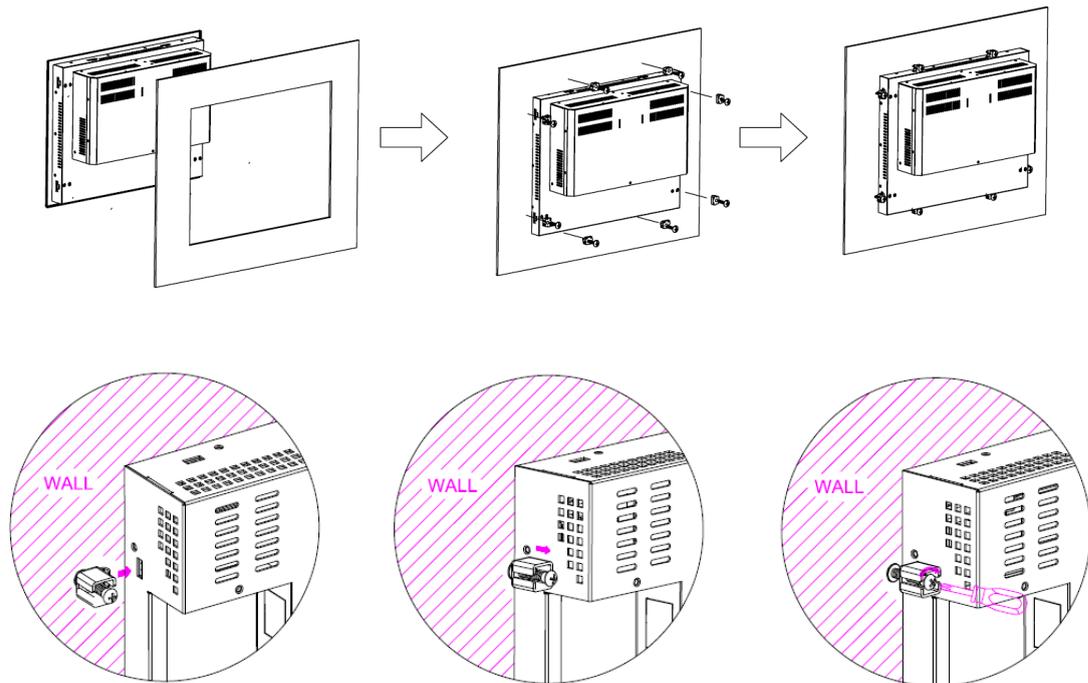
Panel Mounting and Wall Mounting of APC-3x19A
